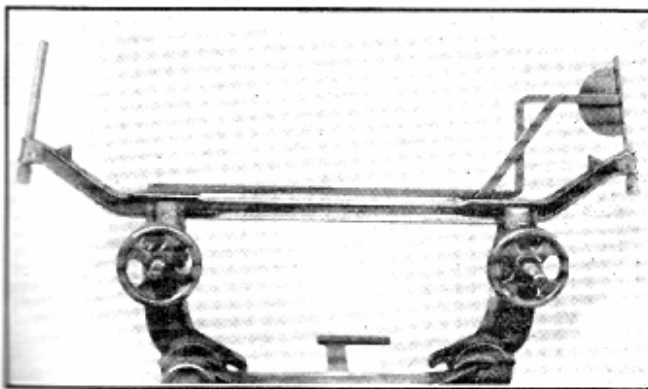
Front Axle "I" Beam Gauge—Tool J-1185
